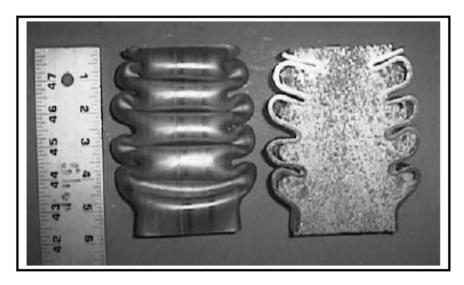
Deformed aluminum foam-filled 304 stainless steel tube after axial compression. (178 mm axial displacement/ 305 mm initial length = 58% strain).
